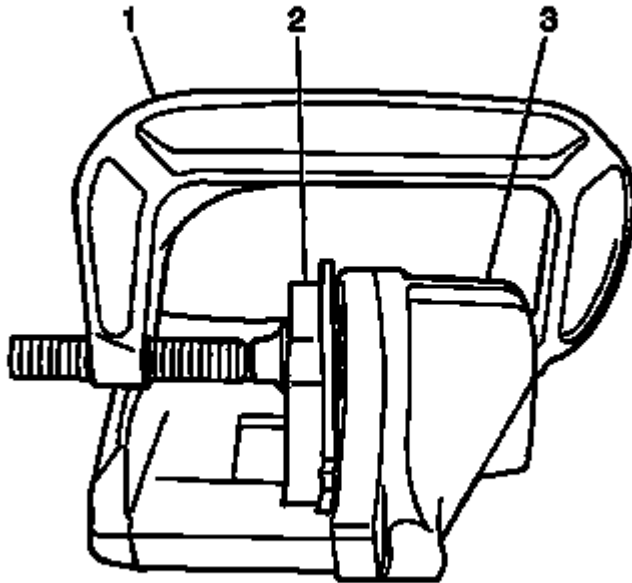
Brake Caliper, Inner Brake Pad And C-Clamp
